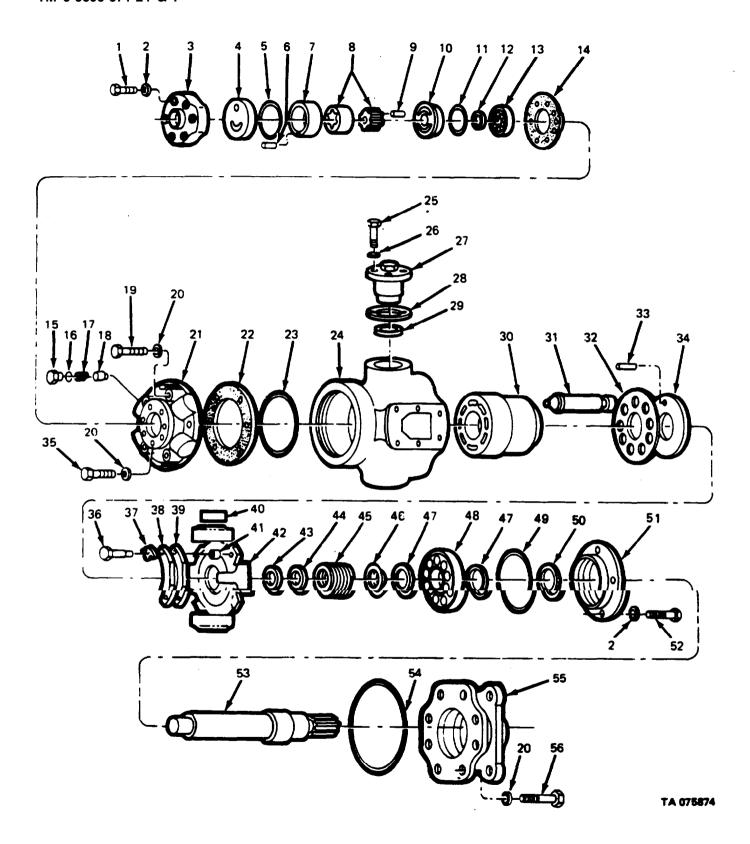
Hydraulic Pump Sectional Drawing (Sheet 1 of 2)
